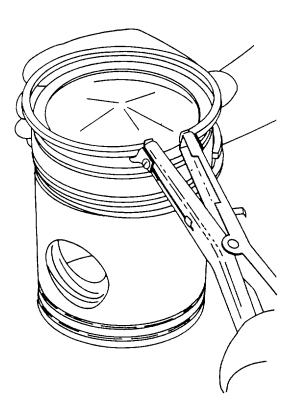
Removing or Installing Piston Rings Using Tool J8128.
